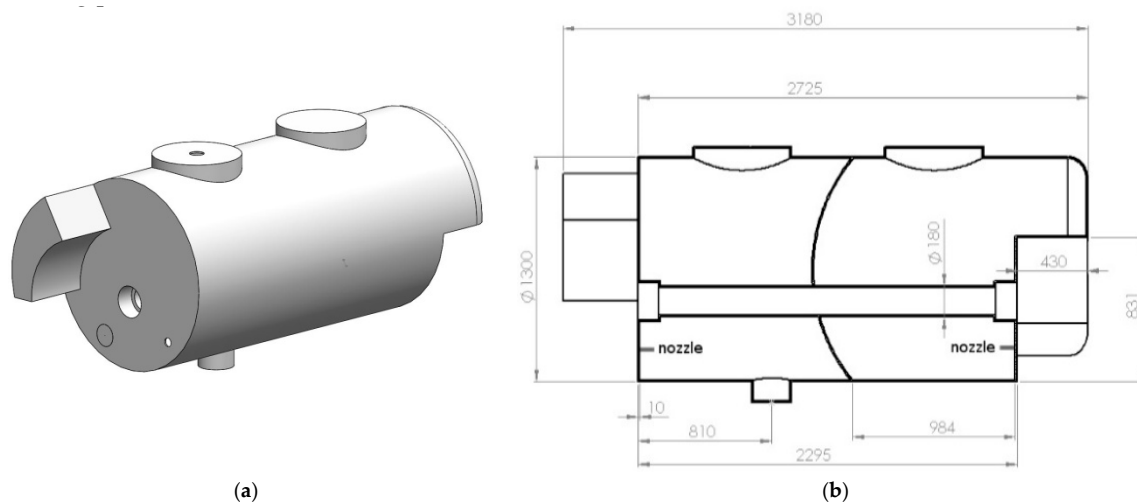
Geometry of the sprayer tank with a 3000 L capacity. (a) Exterior 3D view; (b) longitudinal interior 2D view. Dimensions in millimeters.
